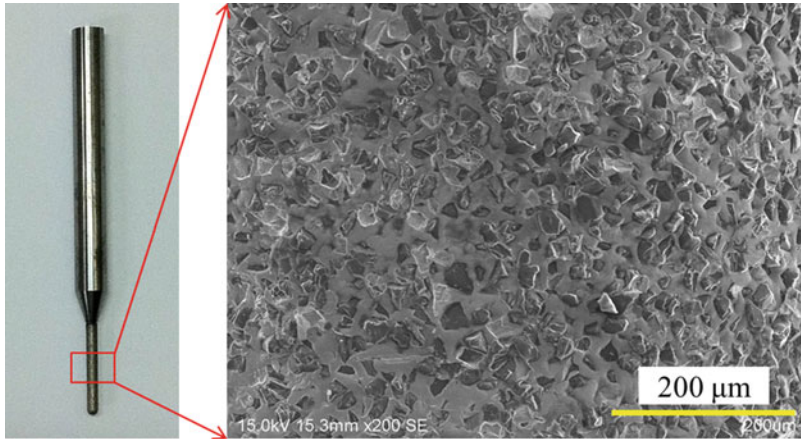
Surface topography of a 600-mesh-size diamond grinding wheel
